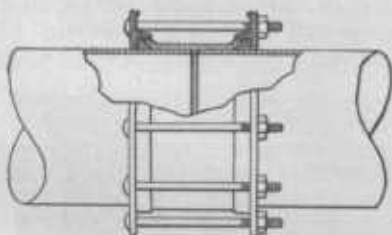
Sleeve coupling for all types of steel pipe.
